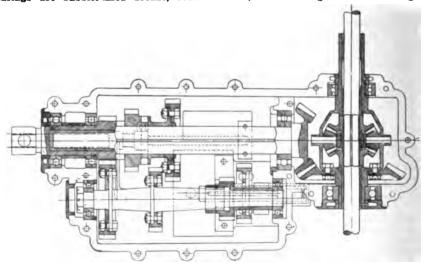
Woods 4-Cylinder Car, transmission assembly. Everything on Hess-Bright ball bearings. Bevel balance gear. High class construction throughout, everything as good as can possibly be made.
